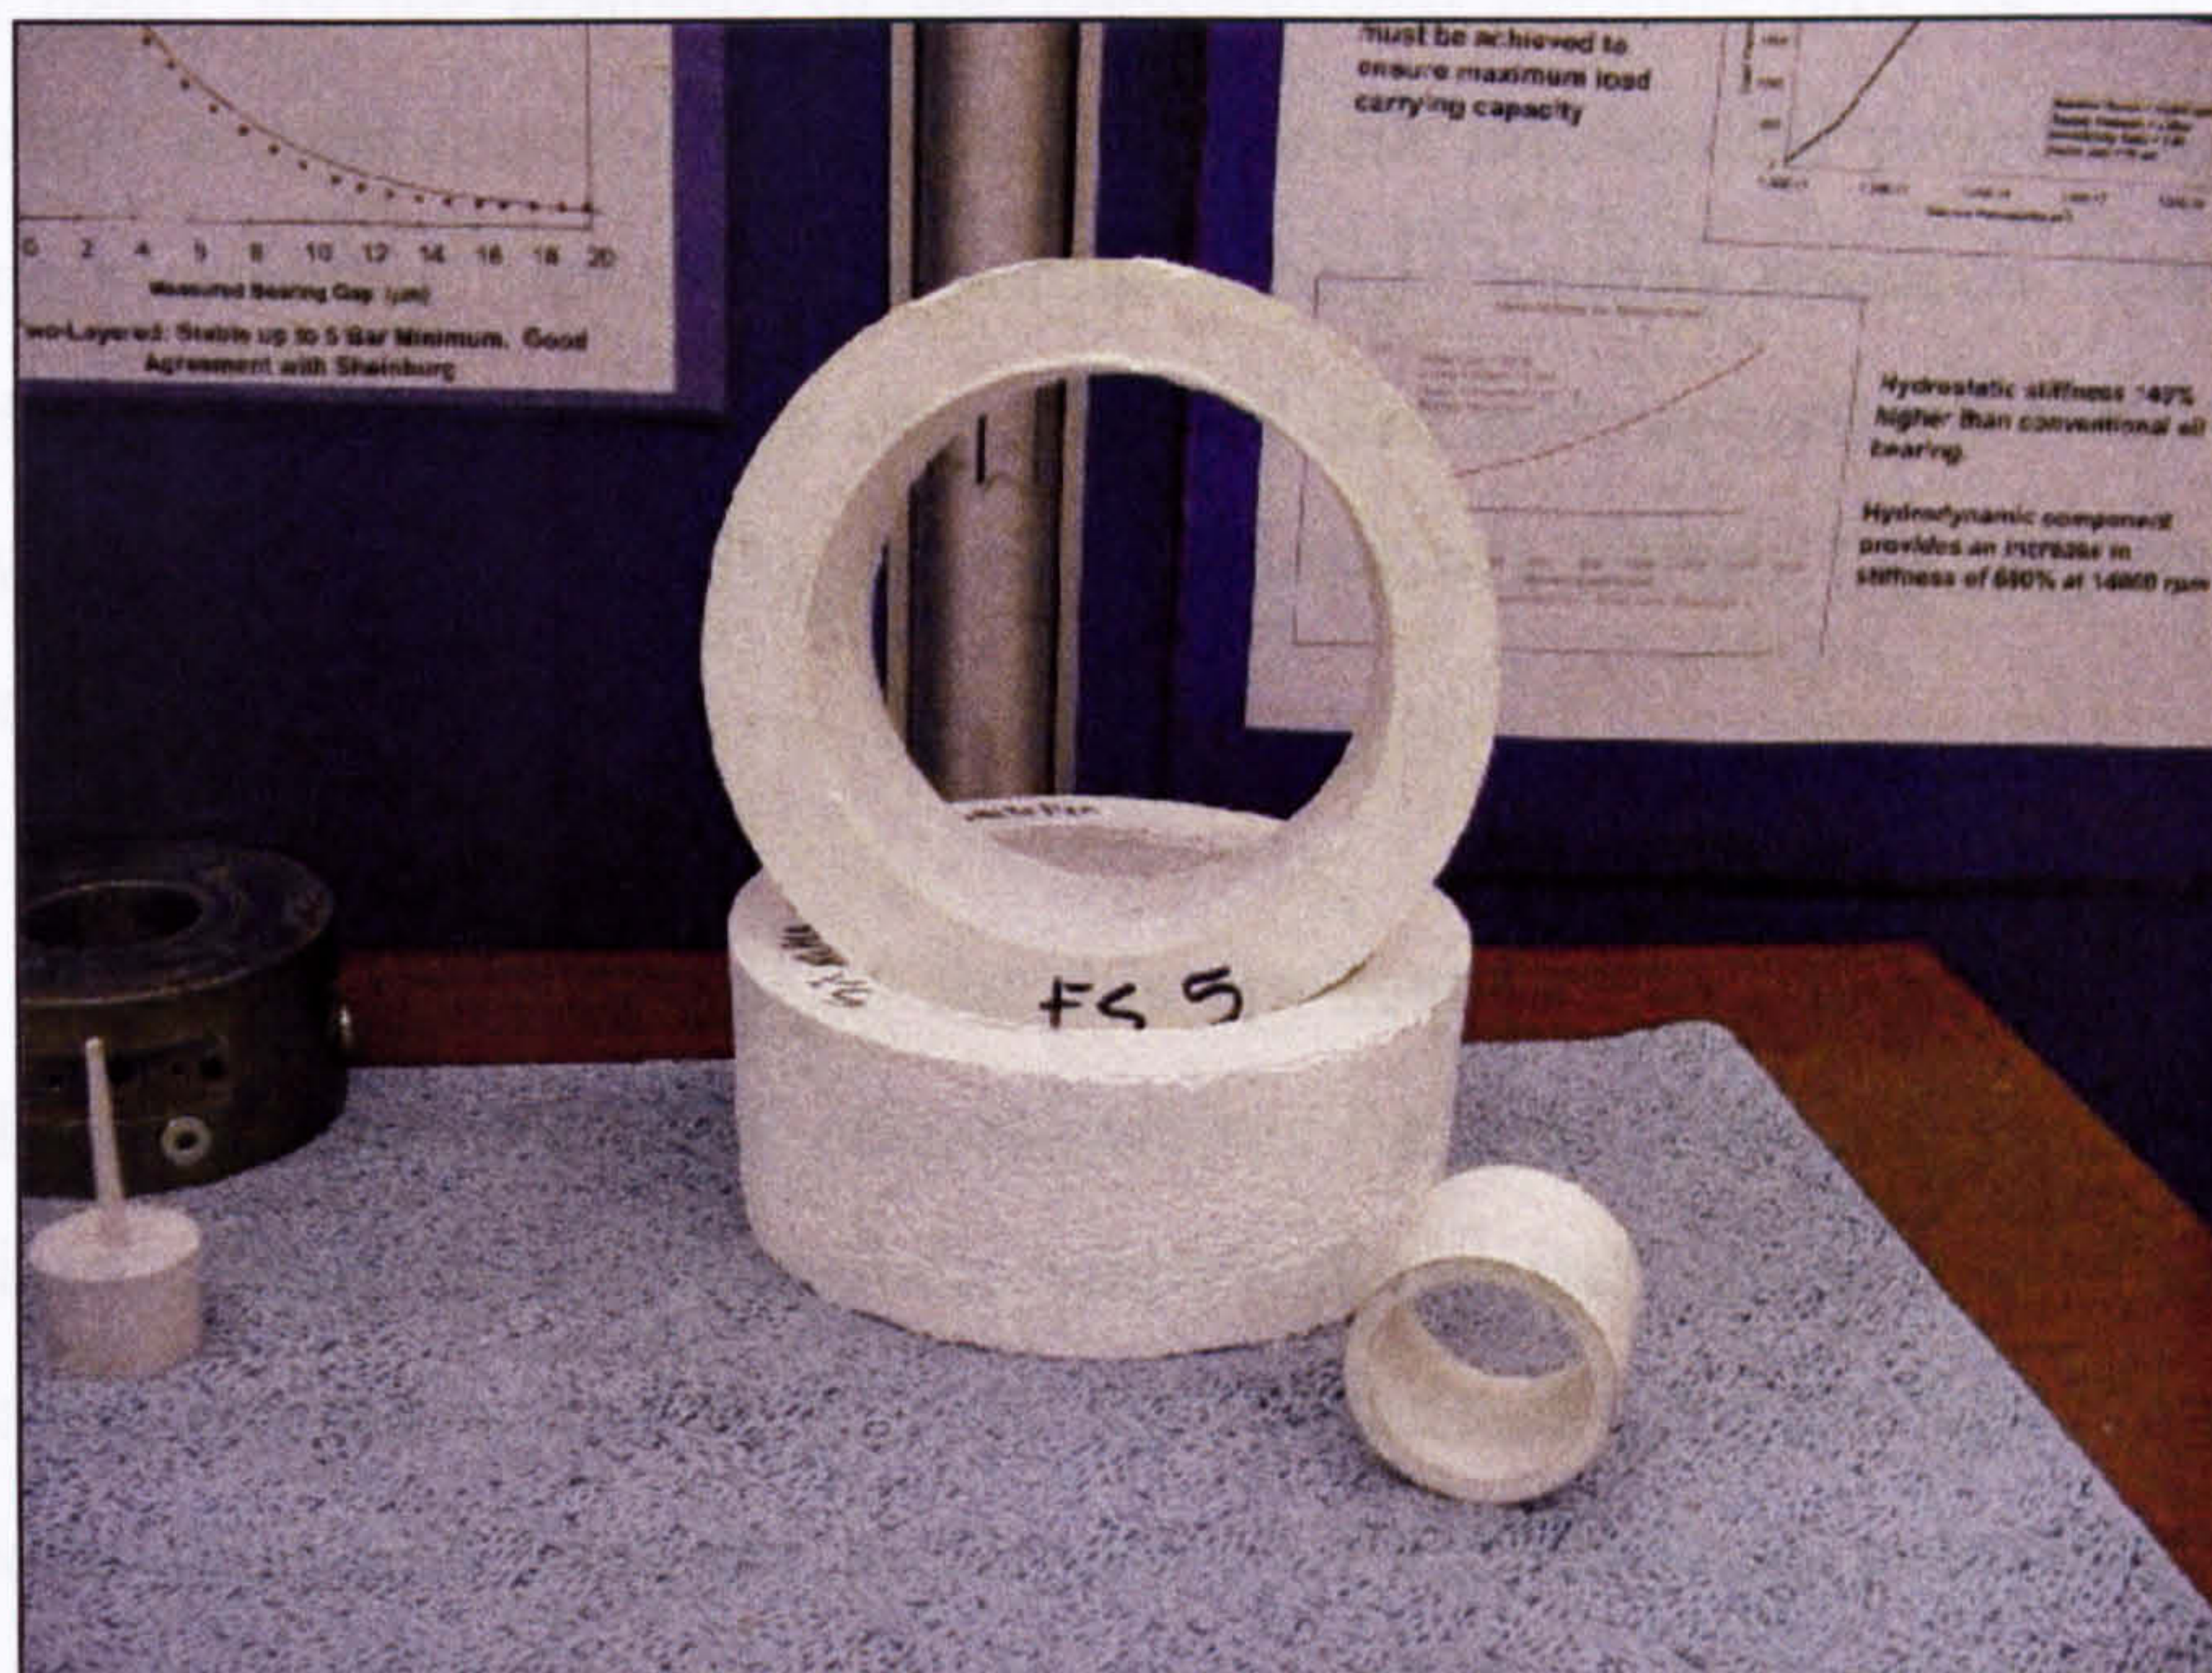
Larger journal bearings (ID 150 mm), produced by the SC technique.
